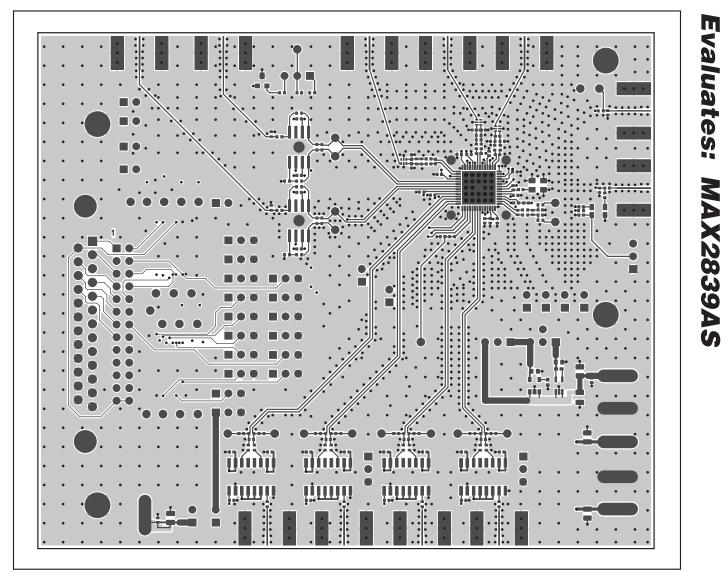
MAX2839AS EV Kit PCB Layout—Component Side
